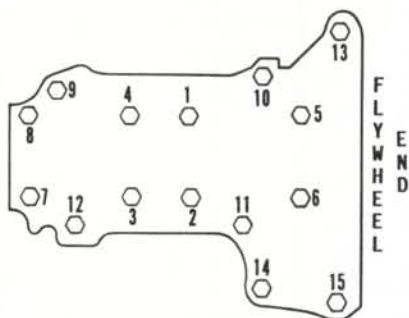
Tighten crankcase cap screws in sequence shown. Refer to text for tightening torque specifications.
